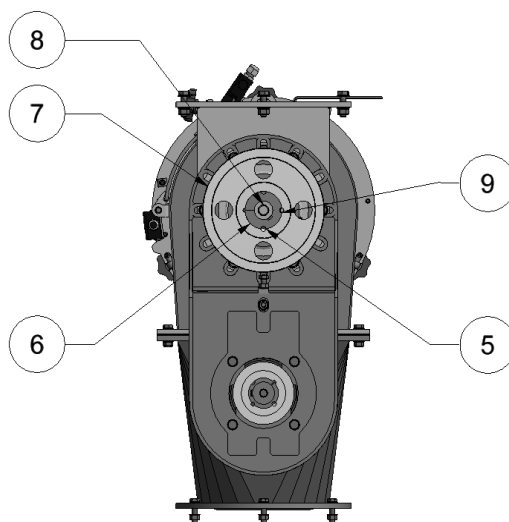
Bearing housing (drive side): Remove V-belt
